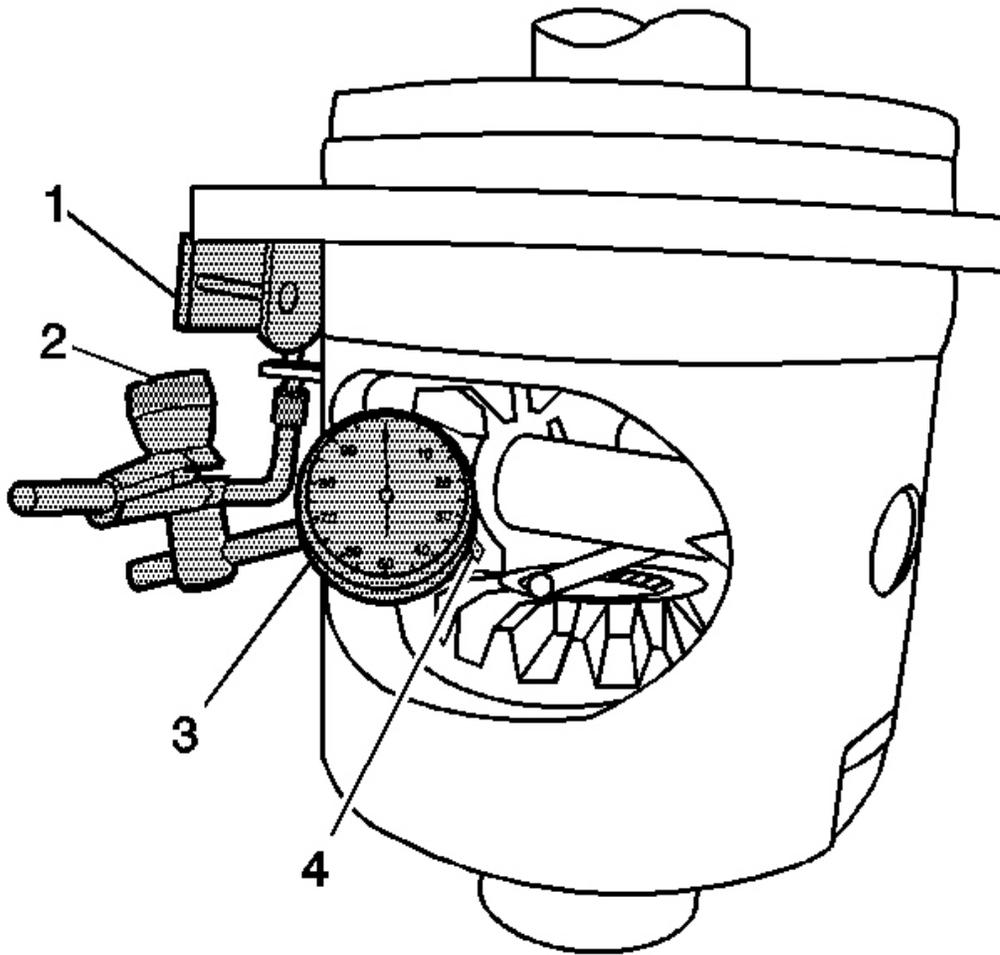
Measuring Backlash Of Pinion Gear Closest To Pinion Shaft Lock Bolt & Differential Side Gear
